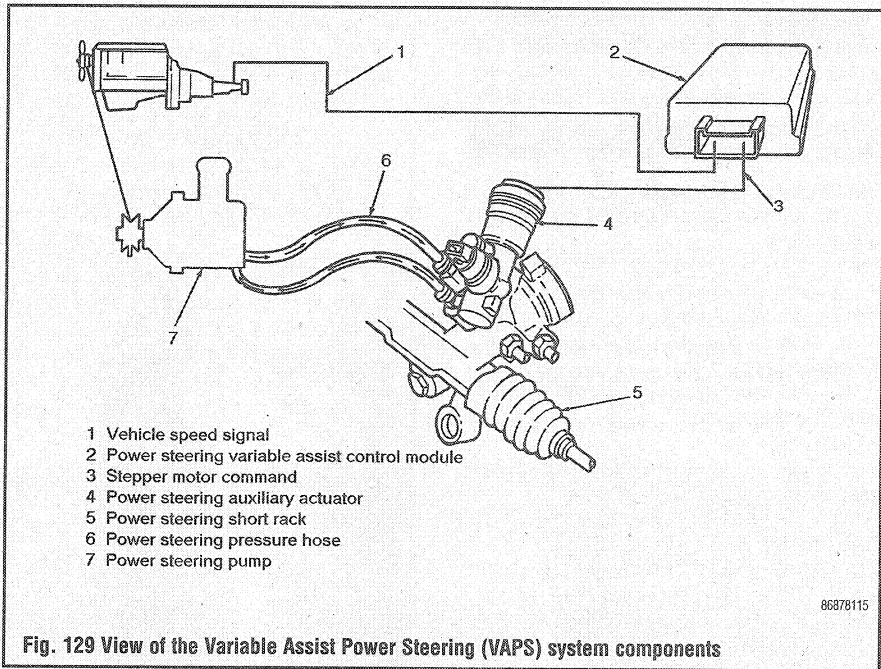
View of the Variable Assist Power Steering (VAPS) system components
